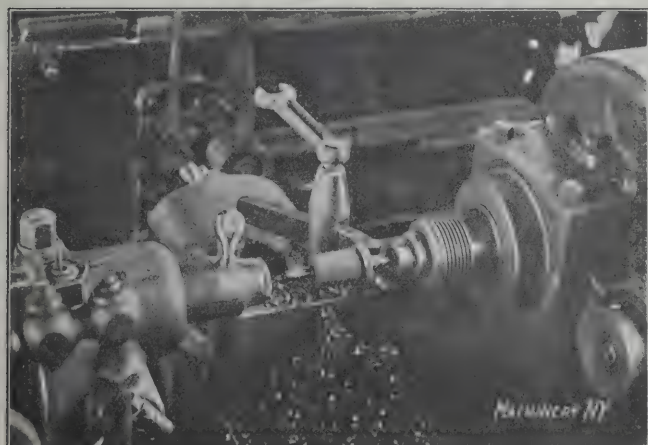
Special Mandrel used to hold Reverse Plate Gear Bushing
